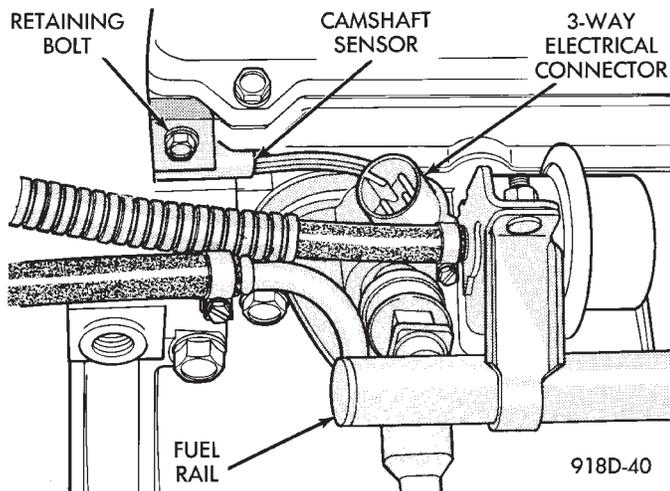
Camshaft Reference Sensor Location—Turbo III Engines
